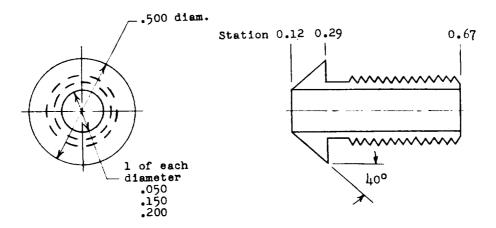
Drawing of 80° total-angle cone showing locations of thermocouples and pressure orifices. All dimensions are in inches.
